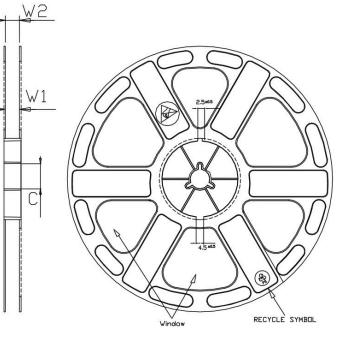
SMT Reel Drawing; Tape Size for ACFM-7045 is 12 mm
